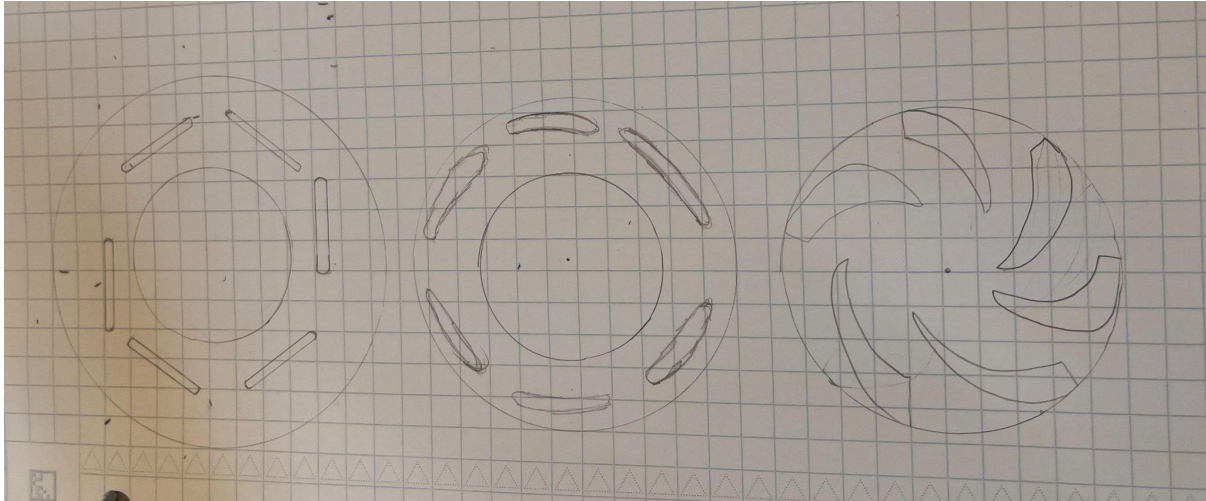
B: *Draft idea for one half of the diaphragm loading mechanism, composing 3 of the total 6 layers. The left-most base layer is fixed, while the middle layer actuates to a motor through gear teeth. The right-most layer is composed of six blades and is sandwiched between the base and actuating layers. All 3 layers are connected through rods which makes the blades dependent on both the actuating layers rotation and the base layer's slots. This design is subject to the most change and will likely require many design iterations.
